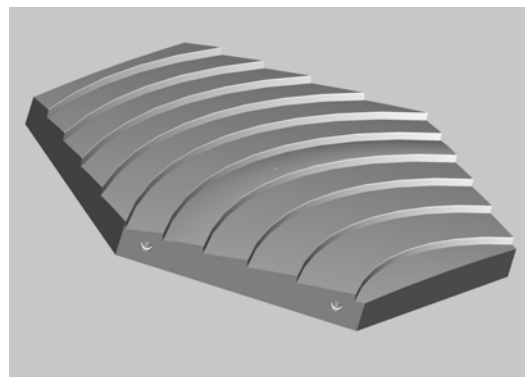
3D-drawing of the mold for the Fresnel modules production.
